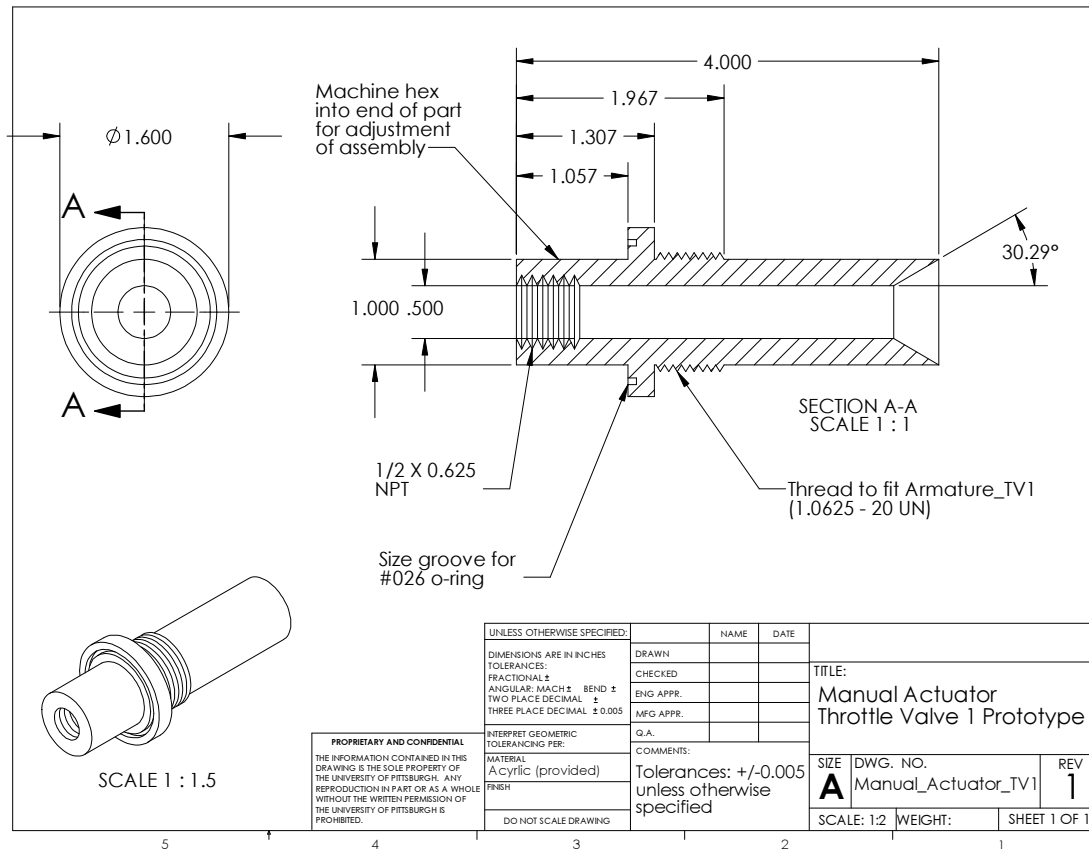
Manual actuator component drawing for barrel valve prototype (TV1).
